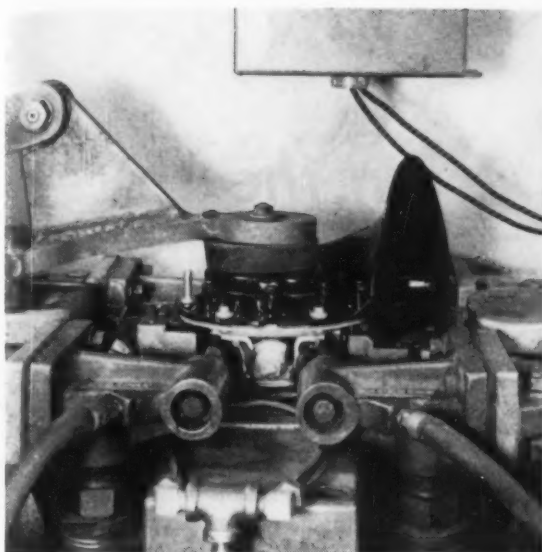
The base of this horn is welded to four poles in one pass by the equipment's four electrodes, only two of which can be seen here. Two welds are made on each of about 500 horns an hour.
